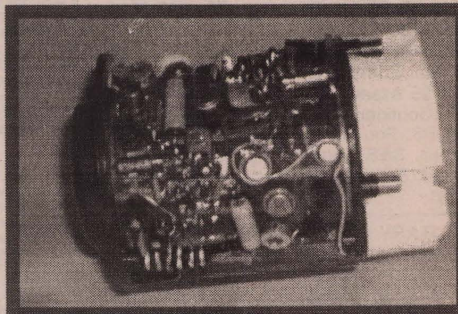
shows the tube assembly with the outer cover removed. Light again enters from the left. Power supply board is now exposed. One inverter is at the lower left. The multiplier is at the bottom. Cover mounting standoffs are at the right, next to some of the stiff white foam.
